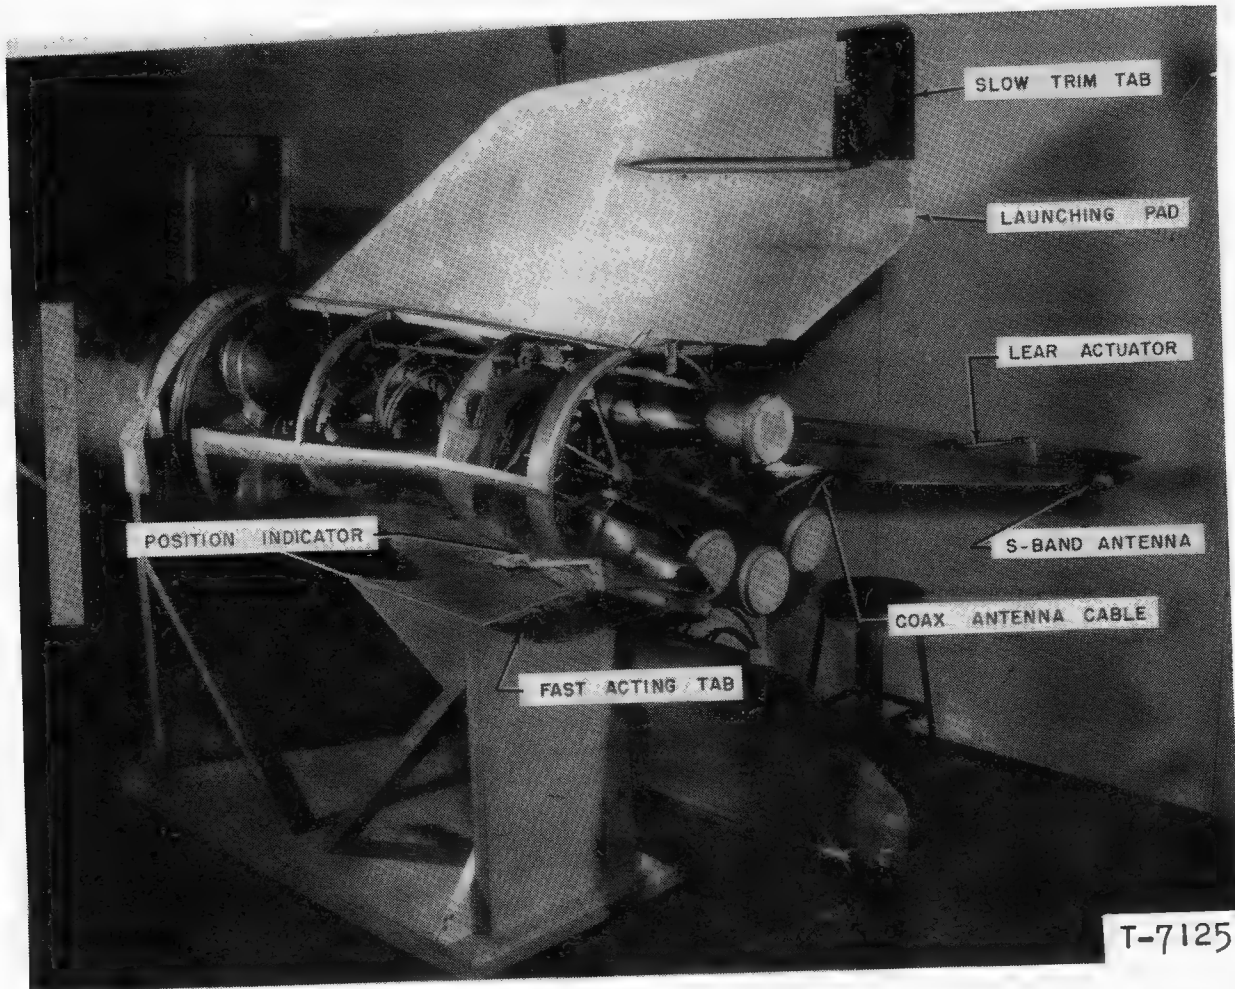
MX-774B EMPENNAGE ASSEMBLY - TAIL CONE REMOVED
